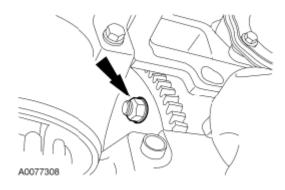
Locating Torque Converter Nut Courtesy of FORD MOTOR CO.
